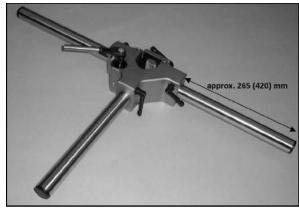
ASSEMBLY OF SUPPORT PIPES IN CENTRE MODULE
